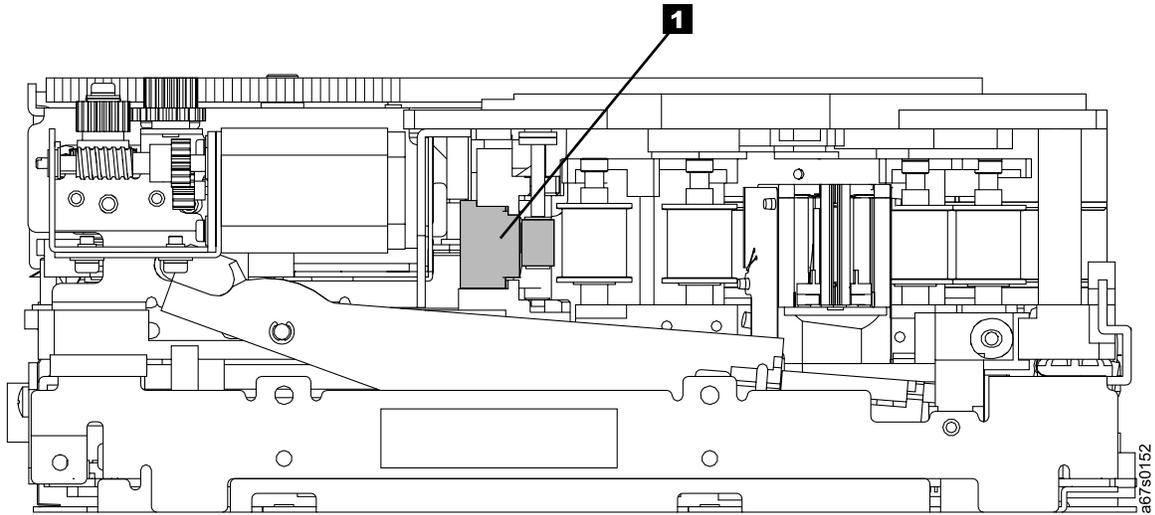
Rotating the loader motor gear so that the leader block retracts. The drive is shown on its side. The head is on the right and the arm of the head brush at the bottom of the figure.
